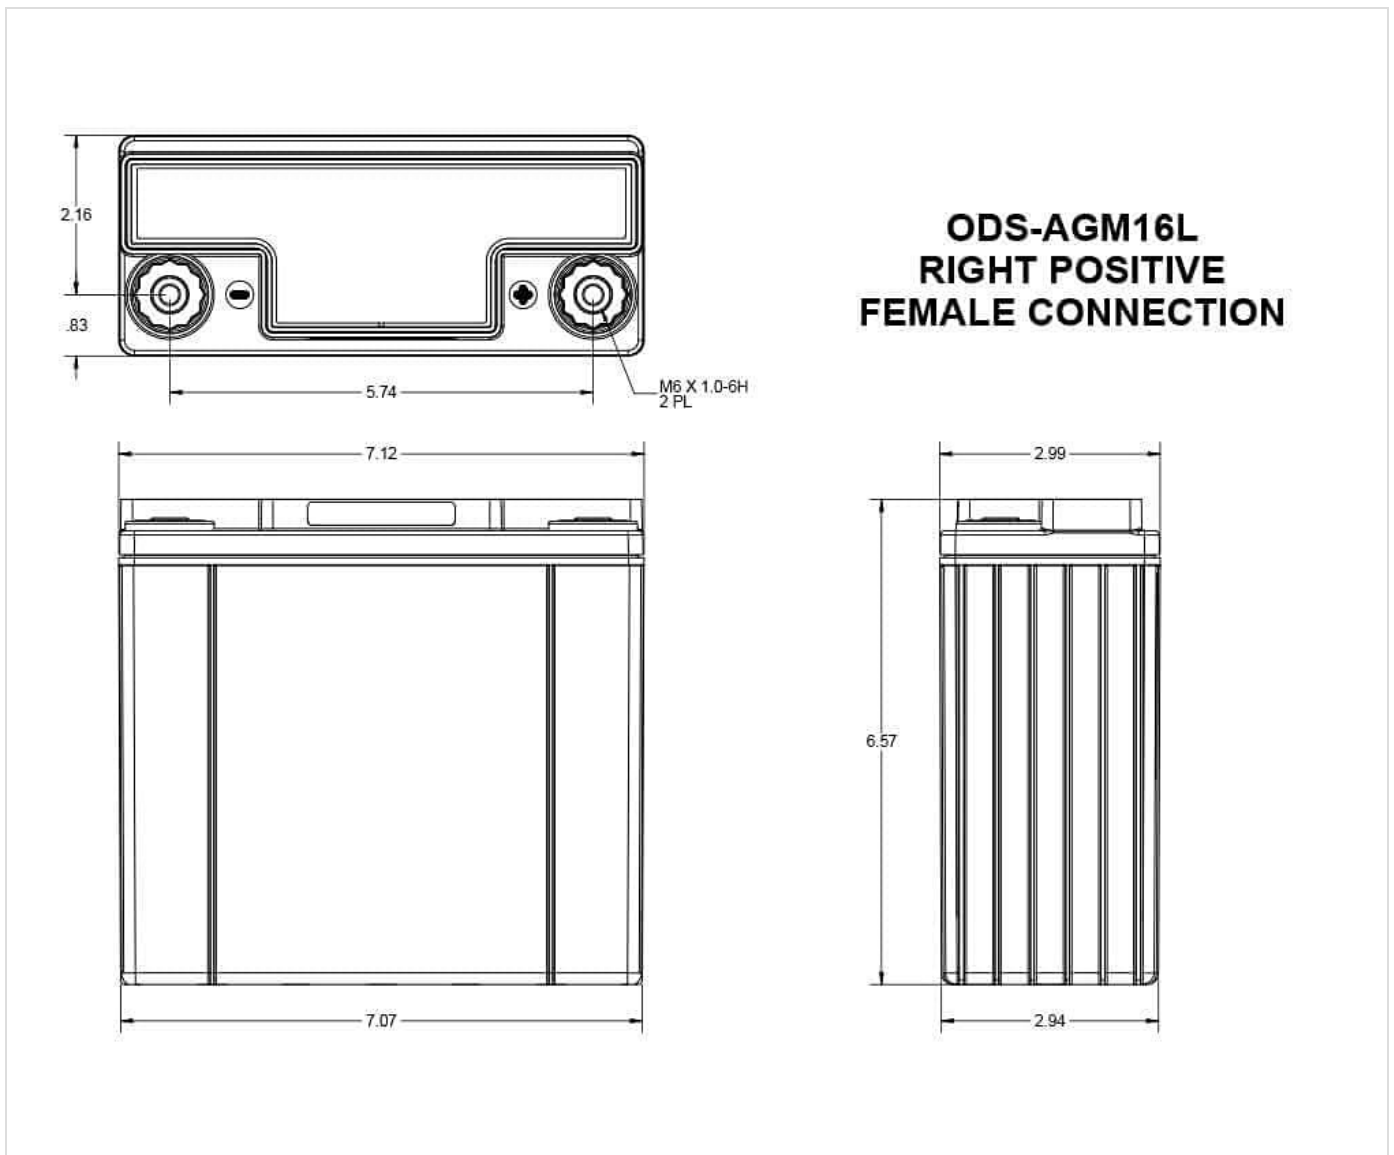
Technical drawing illustrating the dimensions and terminal configuration of the ODS-AGM16L battery, specifically noting the right positive female connection.
